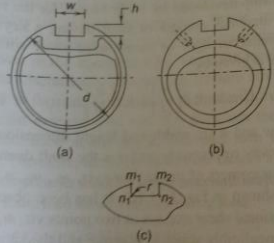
Reduction of stress concentration in shaft with keyway (a) original shaft (b) drilled holes (c) fillet radius
